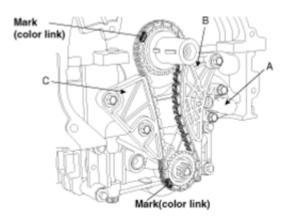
Identifying Balance Shaft Chain Hydraulic Tensioner, Arm, & Chain Guide (2.4 BSM) Courtesy of KIA MOTORS AMERICA, INC.
